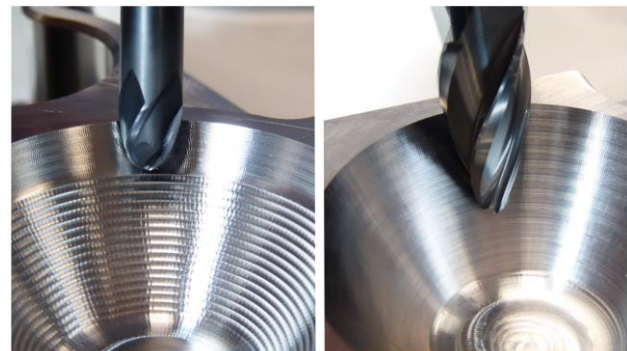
Comparison of the Machined Surface with a Conventional Milling Cutter (left) and Oval-Form Circle Segment Cutter (right) [Emuge Corp 2016].
